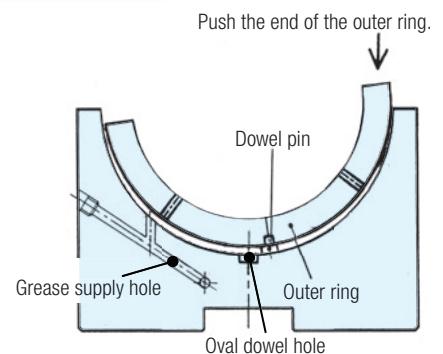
Installation of Bearing Outer Ring to Lower Housing
